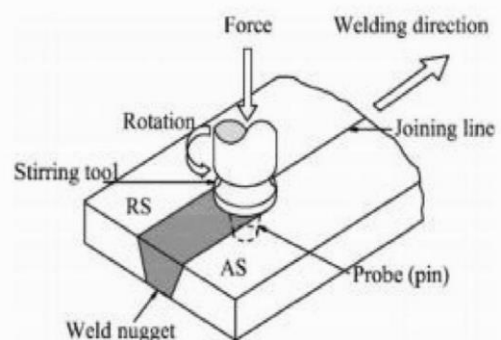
Friction Stir Welding is depicted in a diagram.
